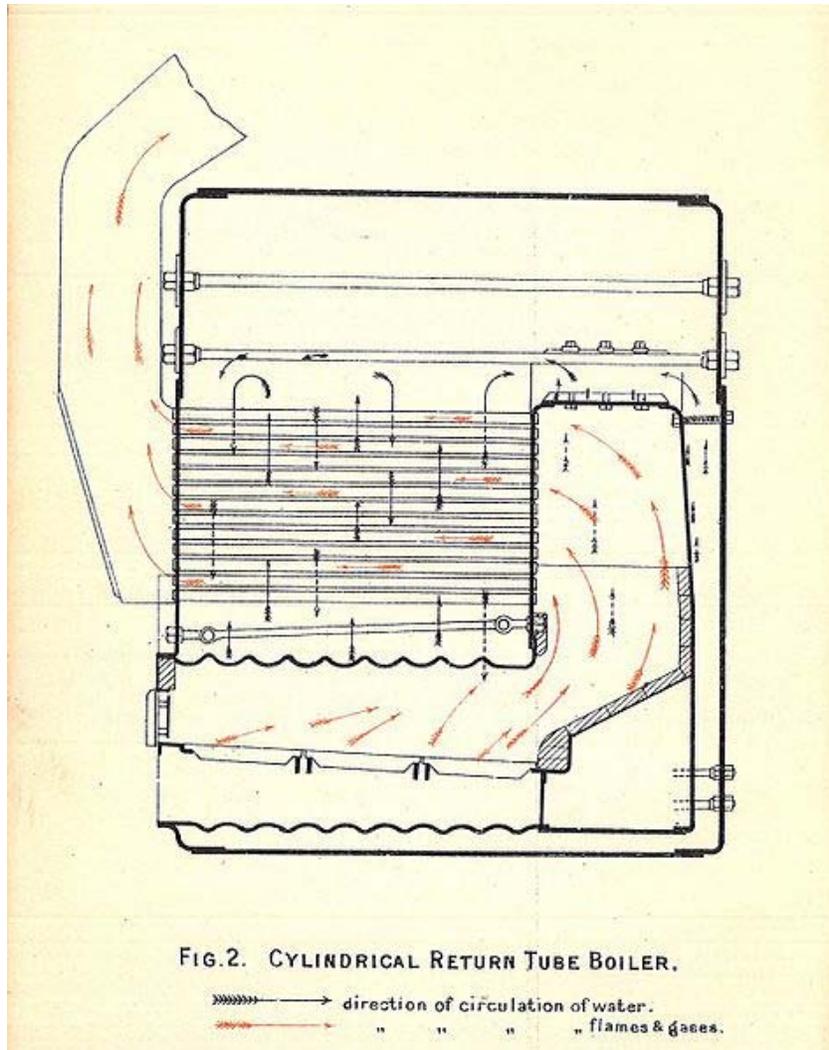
CYLINDRICAL RETURN TUBE BOILER.
